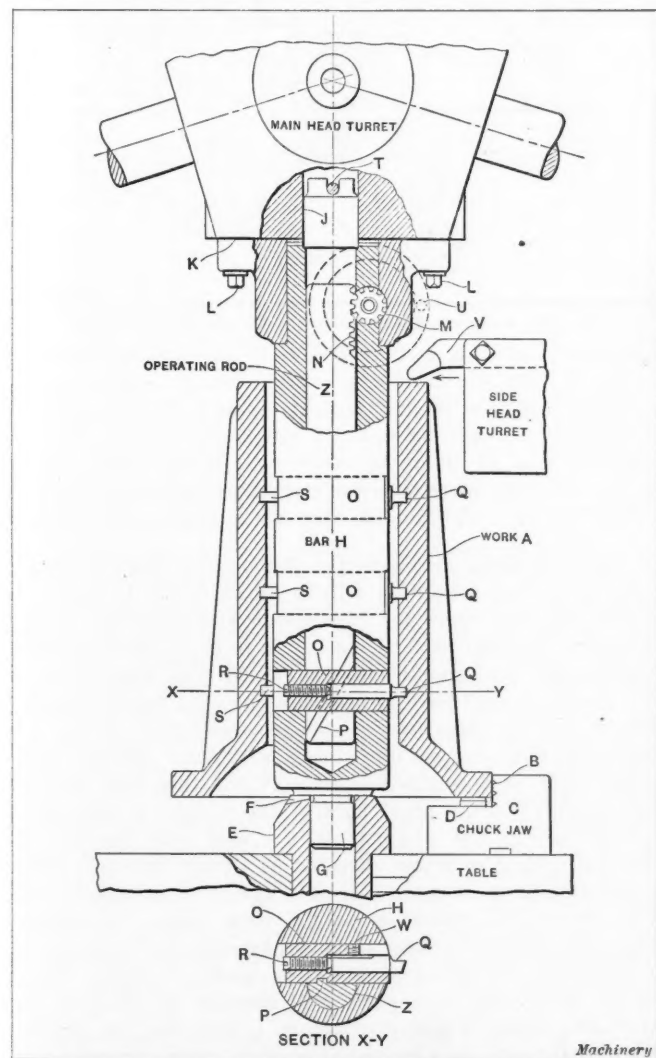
Another Multiple Recessing Tool used in a Vertical Turret Lathe
